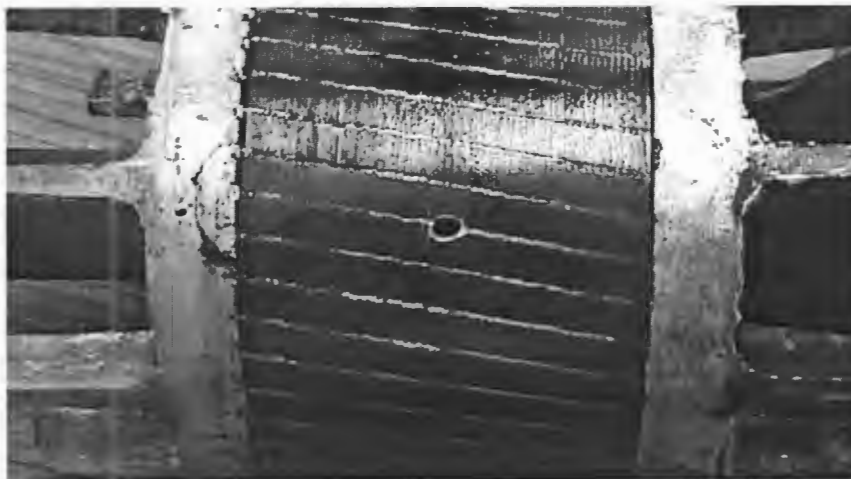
Broken rotor bar in the squirrel cage induction machine
